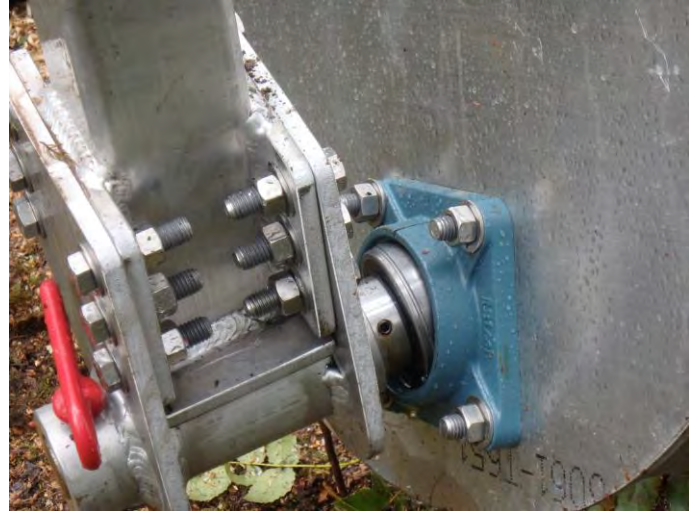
Cracked bearing housing on the trolley bucket. March 24, 2016.
